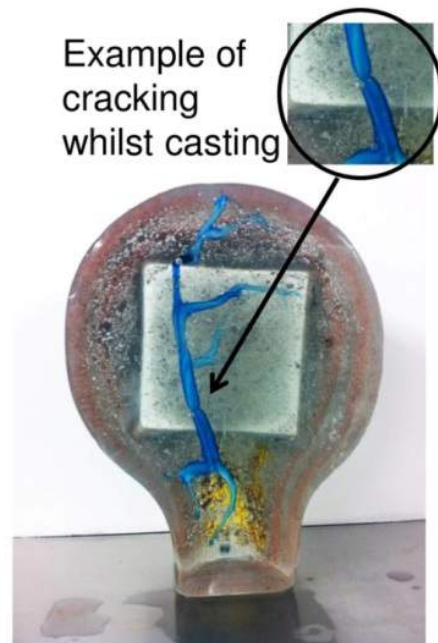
Floating inclusion cracking due to the shock of being transferred into hot sandcast with cold metal tool, 2013. Photography credit: J A Denton
